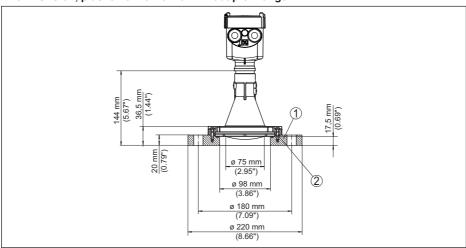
VEGAPULS 6X with adapter flange DN 100 PN 6
